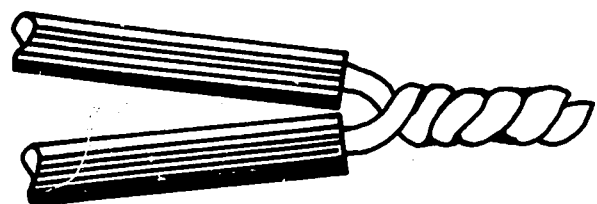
A-4. Wires Twisted Together for Solderless Connector
